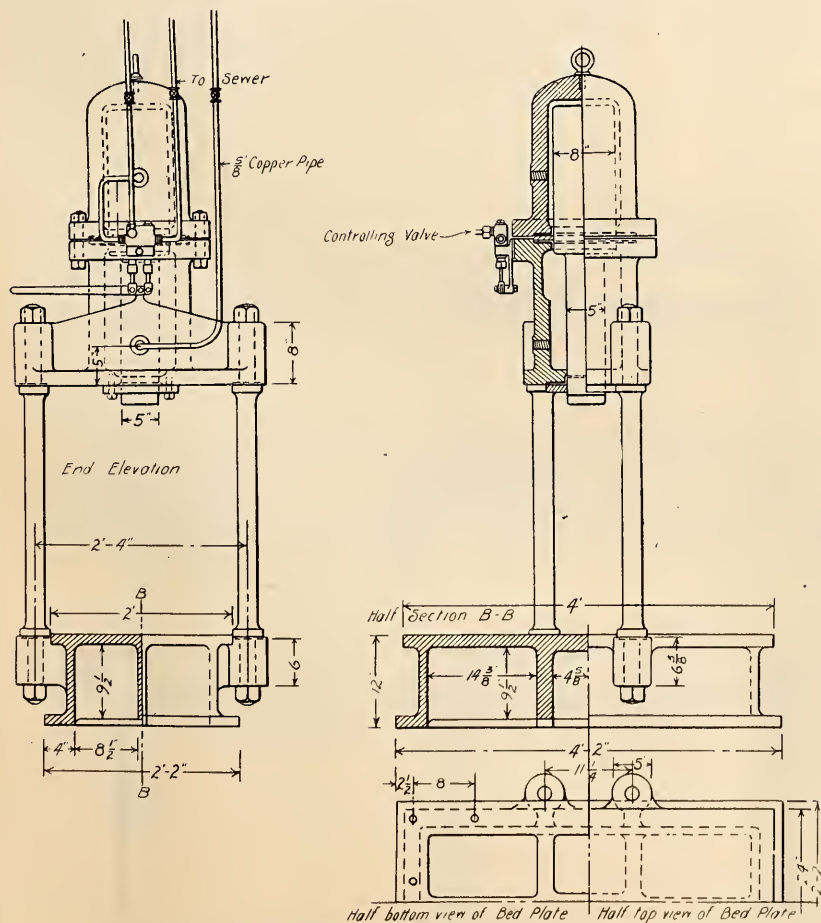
END ELEVATION AND HALF SECTION OF HYDRAULIC DRIVING BRASS PRESS—L. S. & M. S. RY.
